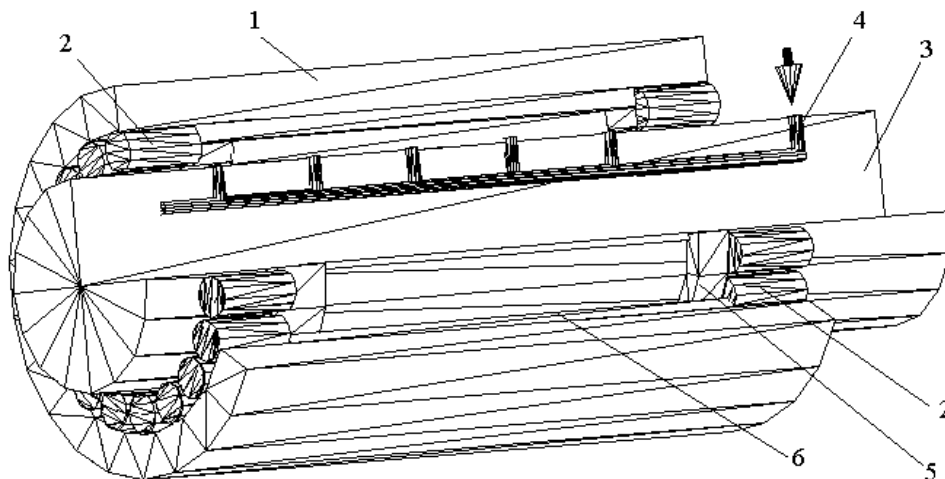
Fluid-filled shaft with hydraulic deflection adjustment
